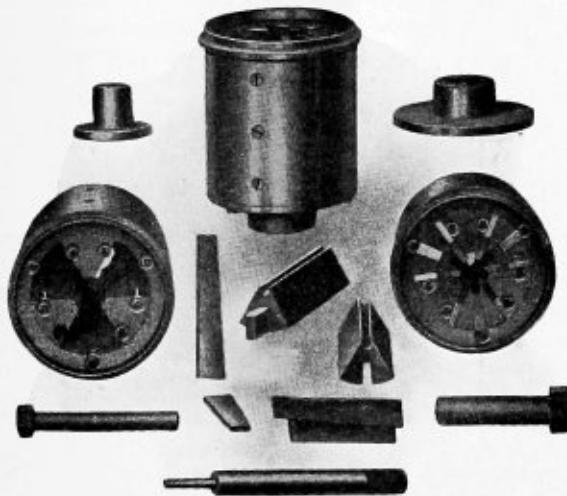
CUTTER HEAD AND ATTACHMENTS
